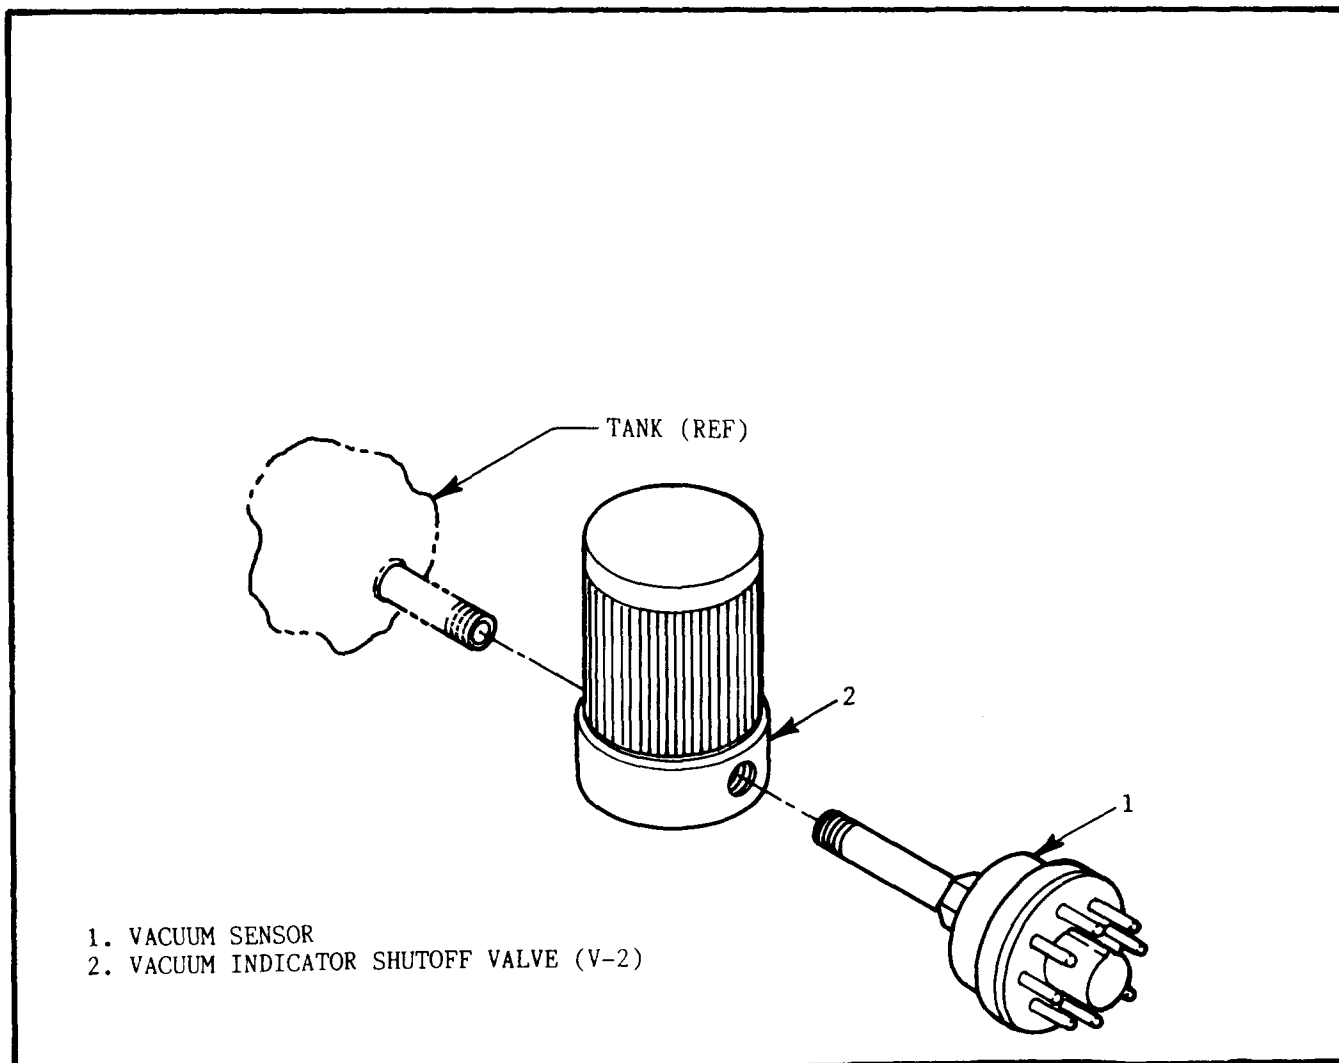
Vacuum Sensor and Vacuum Indicator Shutoff Valve.
